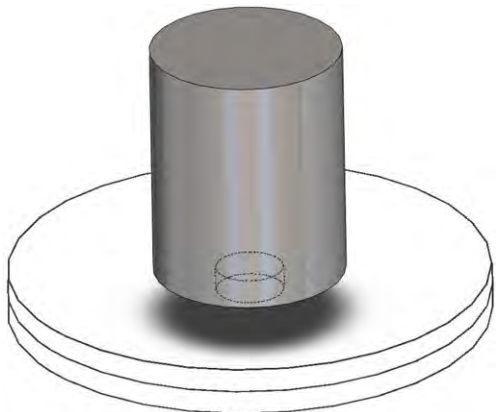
Schematic views of the friction stir spot welding process.
